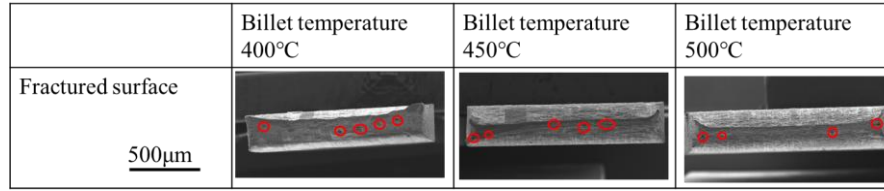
Fracture surfaces of extruded products obtained at different billet temperatures.
